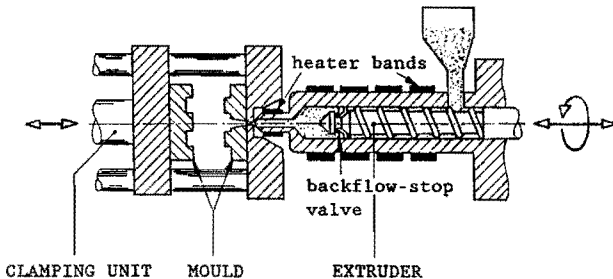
The essential parts of a reciprocating screw injection moulding machine.
